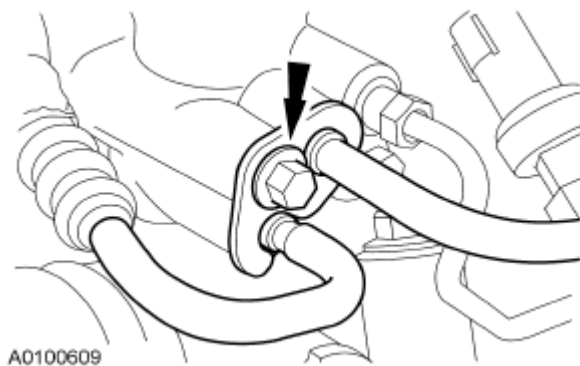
Locating Power Steering Fluid Tubes Bolt
